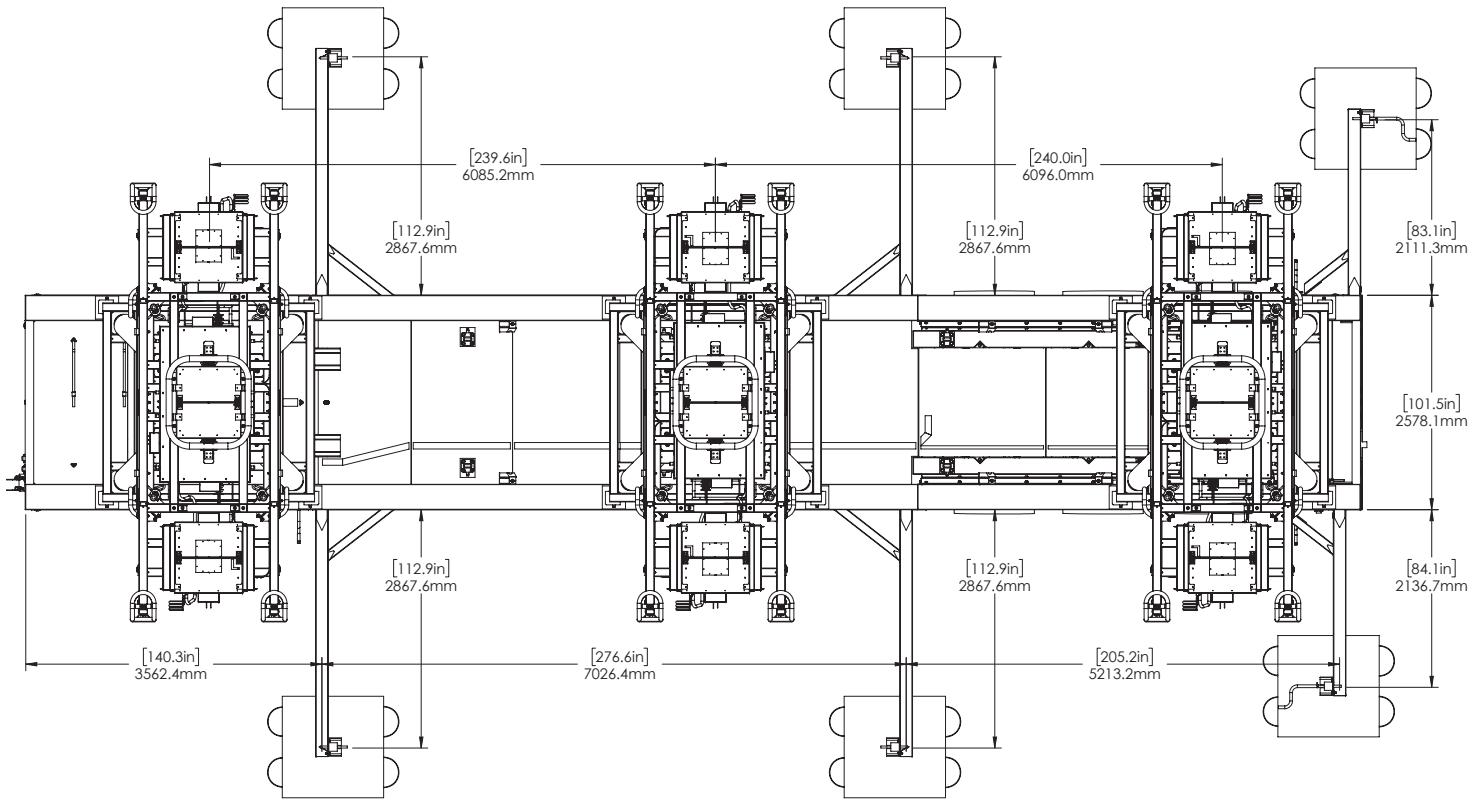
Mobile SmartValve Unit – Deployment Configuration Top View
